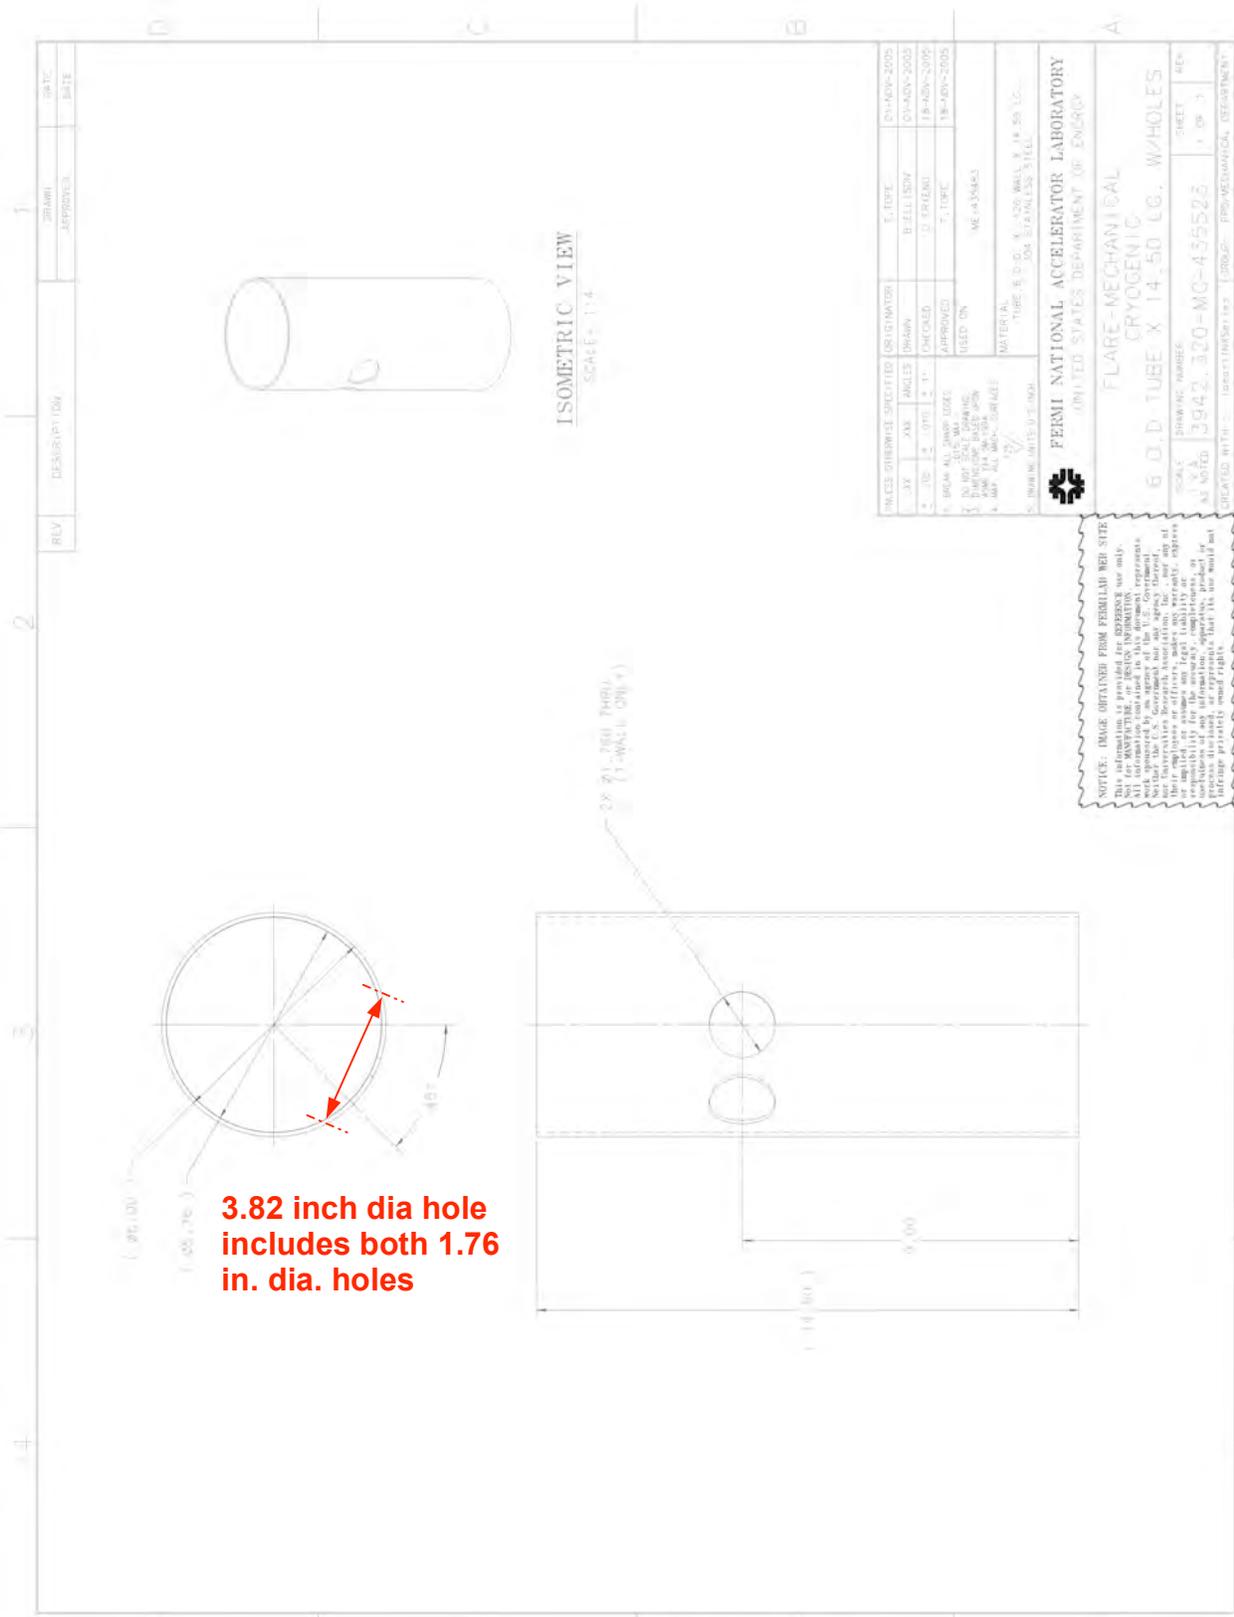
Two closely spaced penetrations on the 6 in. OD nozzle.
